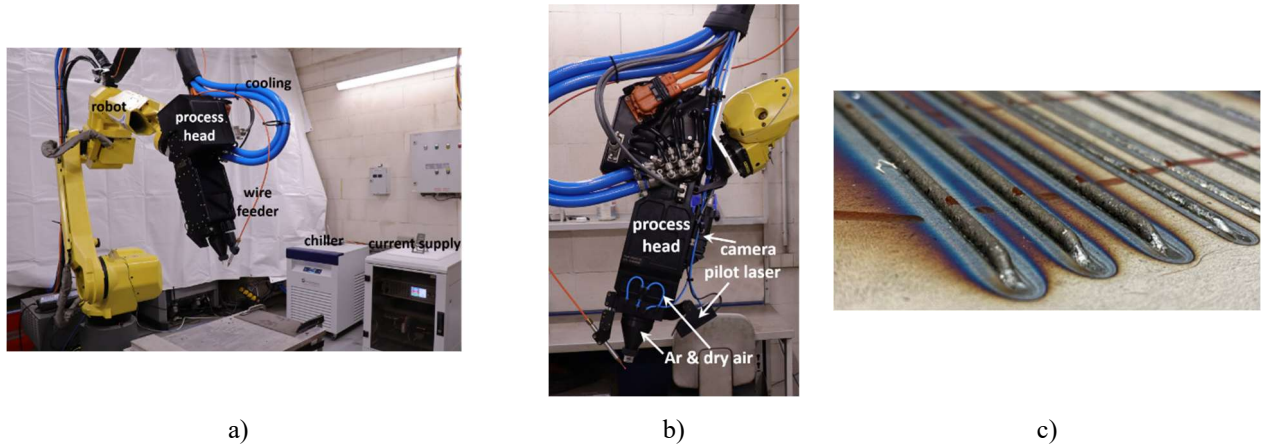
a) Direct diode laser process head mounted on a robotic arm at Photon Laser Manufacturing GmbH with the chiller, current supply and the industrial wire feeder. b) process head with camera housing and support for cooling water, high current cables and flashing dry air. c) first attempts of a printed 3D-support structure on steel.
